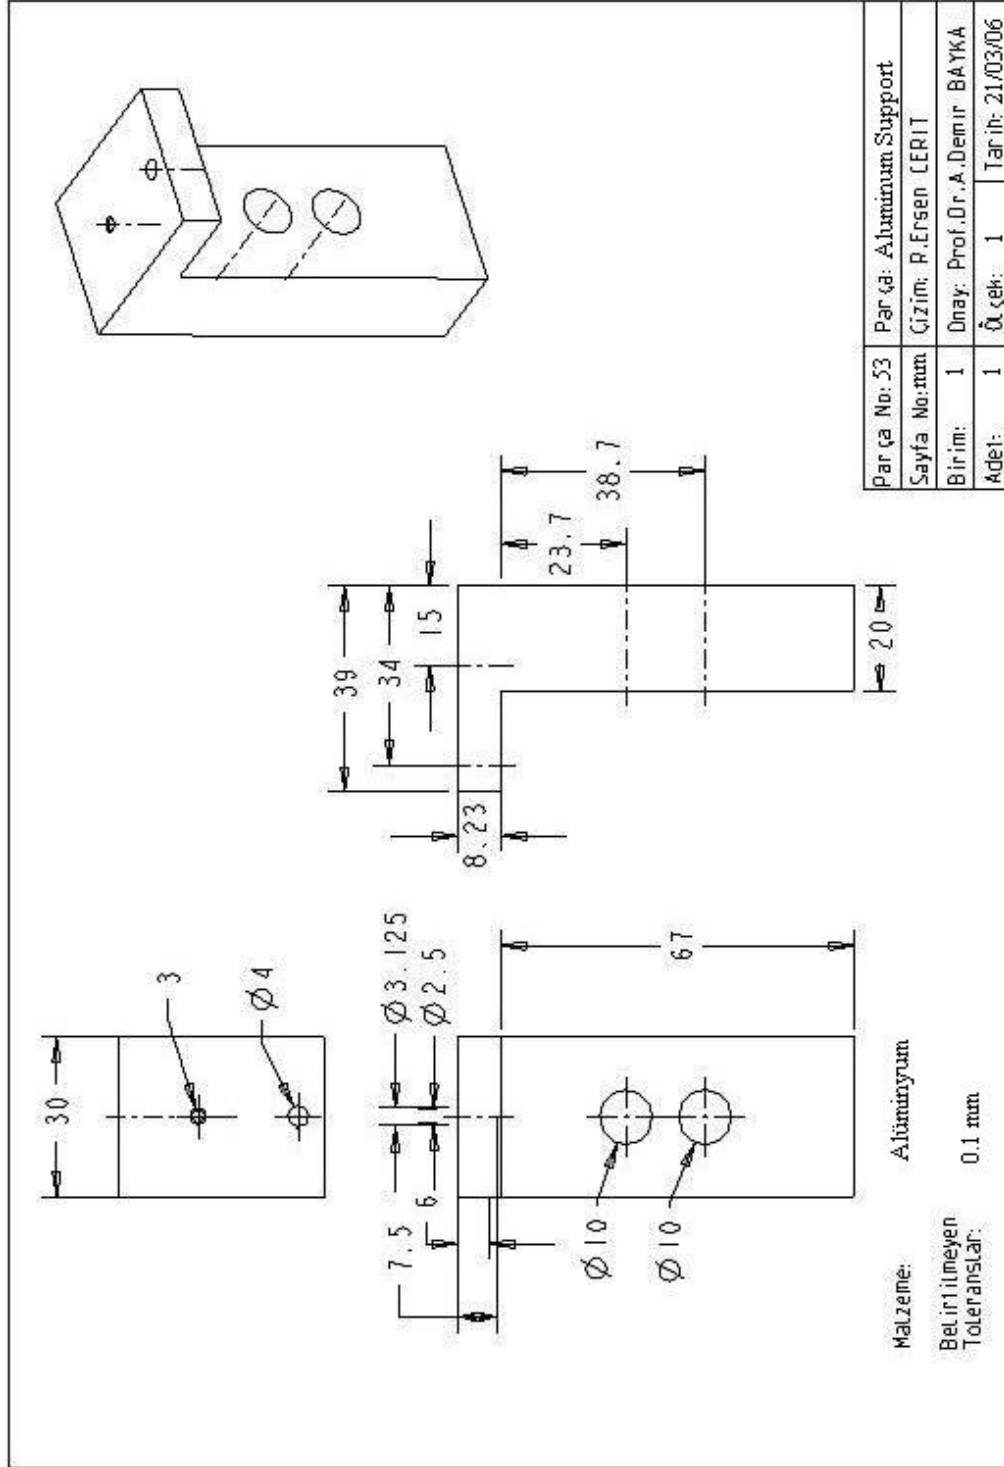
Technical Drawing of Aluminum Support for Fuel Container.
